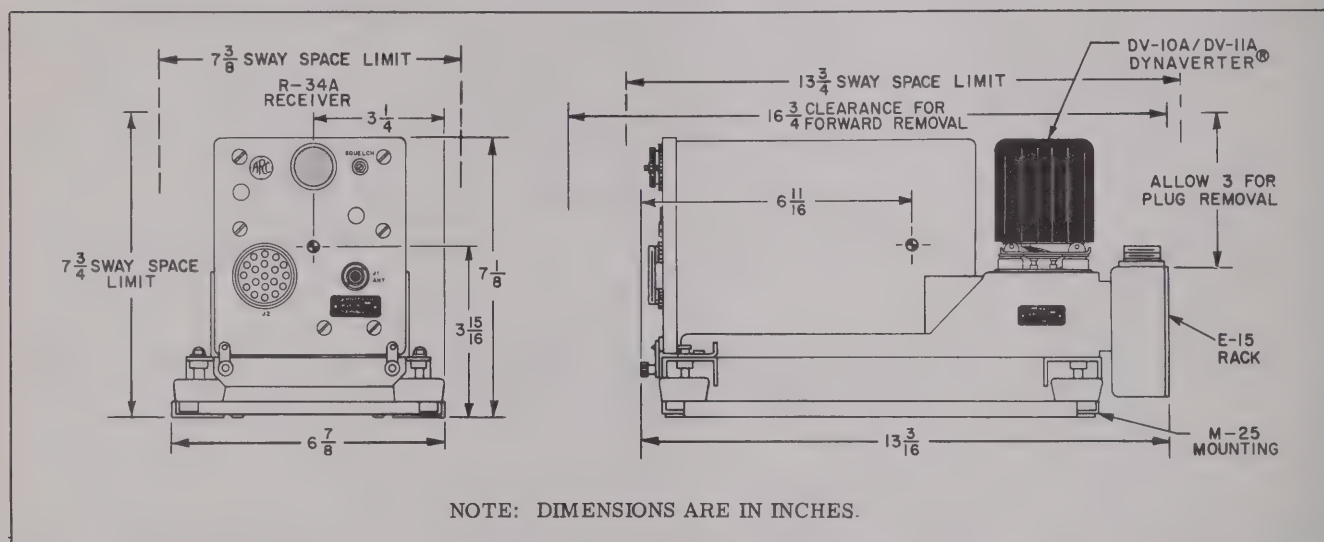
E-15 Rack and M-25 Mounting, Installation Dimensions
